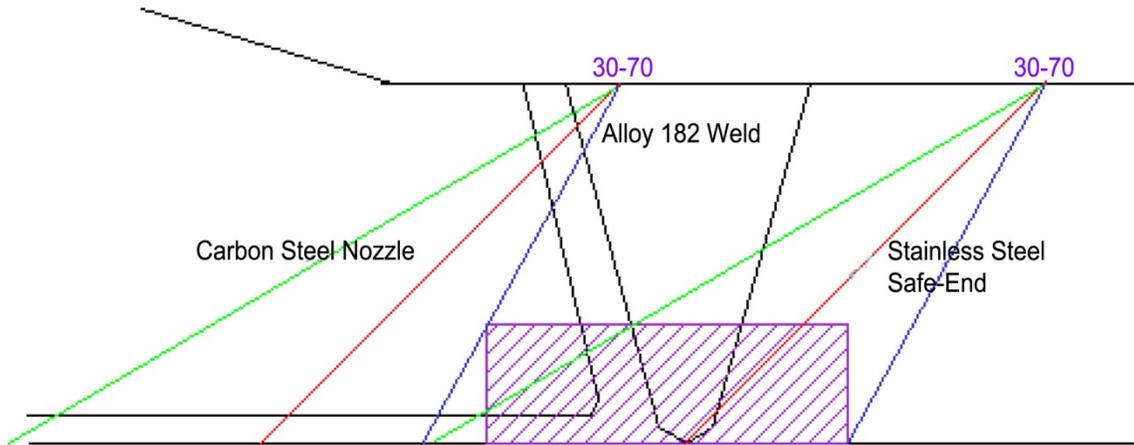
RPV Cold Leg Nozzle Weld Axial Scan CRV Coverage
